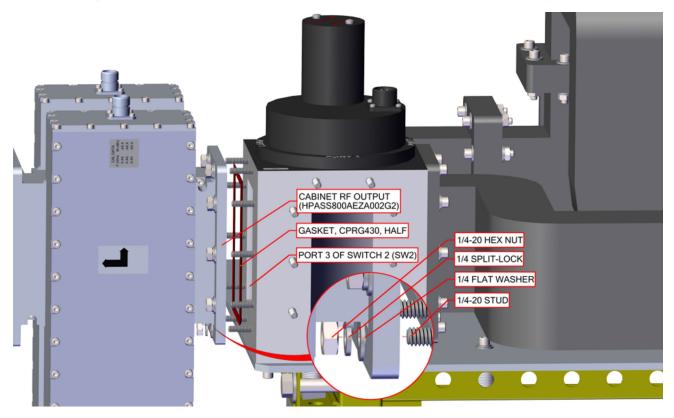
Connect Cabinet 2 (HPASS800AEZA002G2) to Switch Assembly
